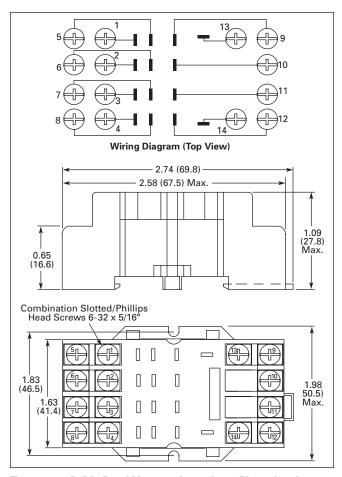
D7PA4 Panel Mount — Approximate Dimensions in Inches (mm)
